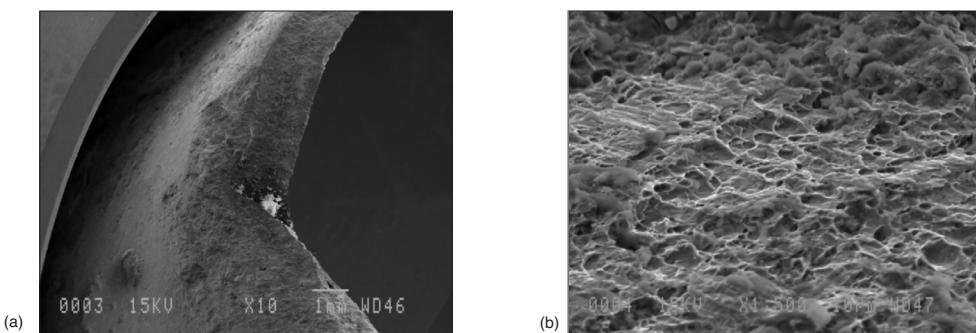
(a) Fractography of fracture surface at 10X; (b) Close-up of the fracture surface at 1500X, after Hadjigeorgiou *et al.* (2002)
